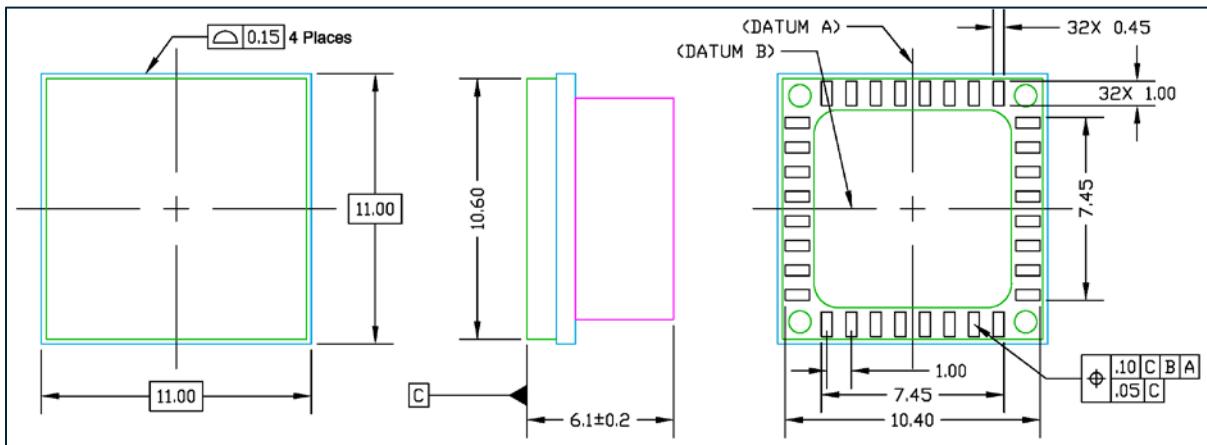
SE868 Family (high profile) Mechanical Drawing
